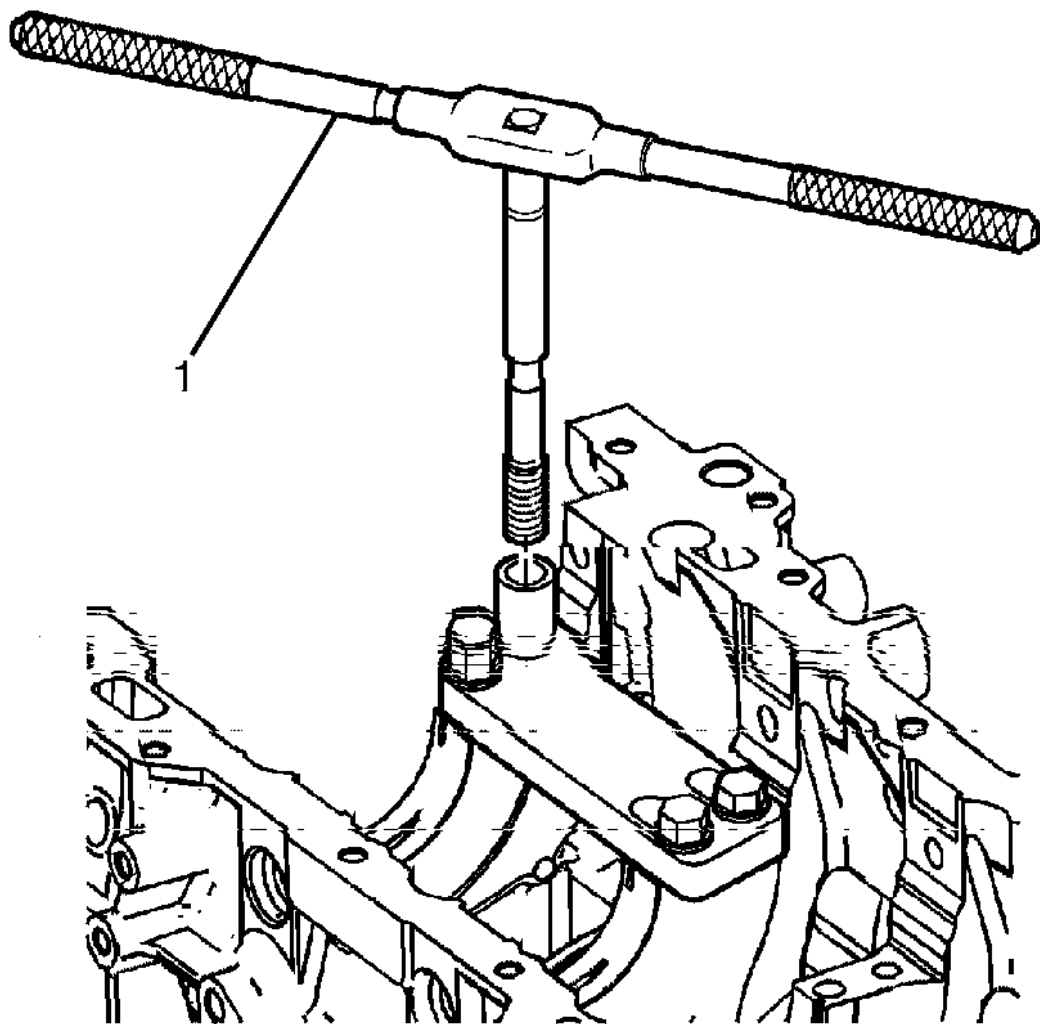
Identifying Insert & Driver Installation Tool
